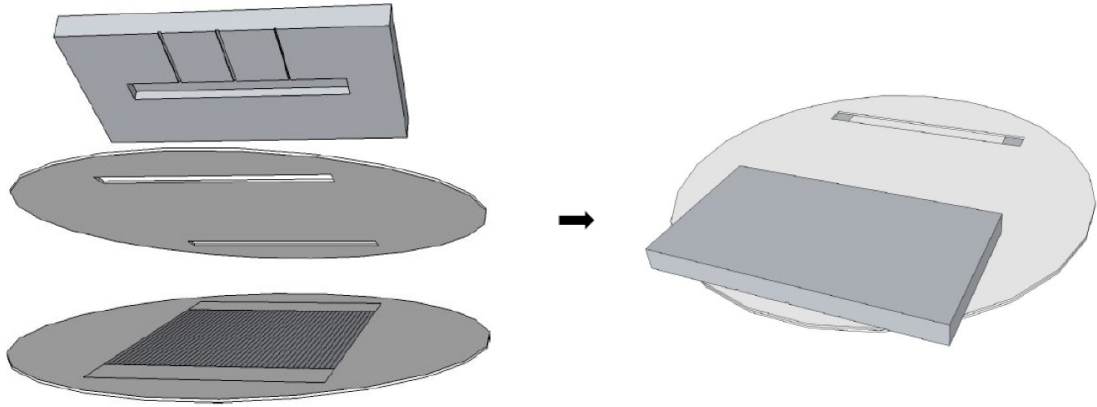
Three dimensional sketch of the Pyrex[®] piece that was glued to the wafers (left), and of the assembled pieces (right) in the second setup.
